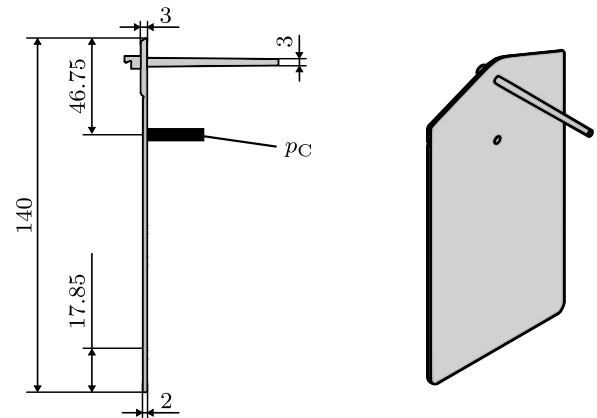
The plate part used to test the control approach, adapted from [16]. The part dimensions are given in mm.
